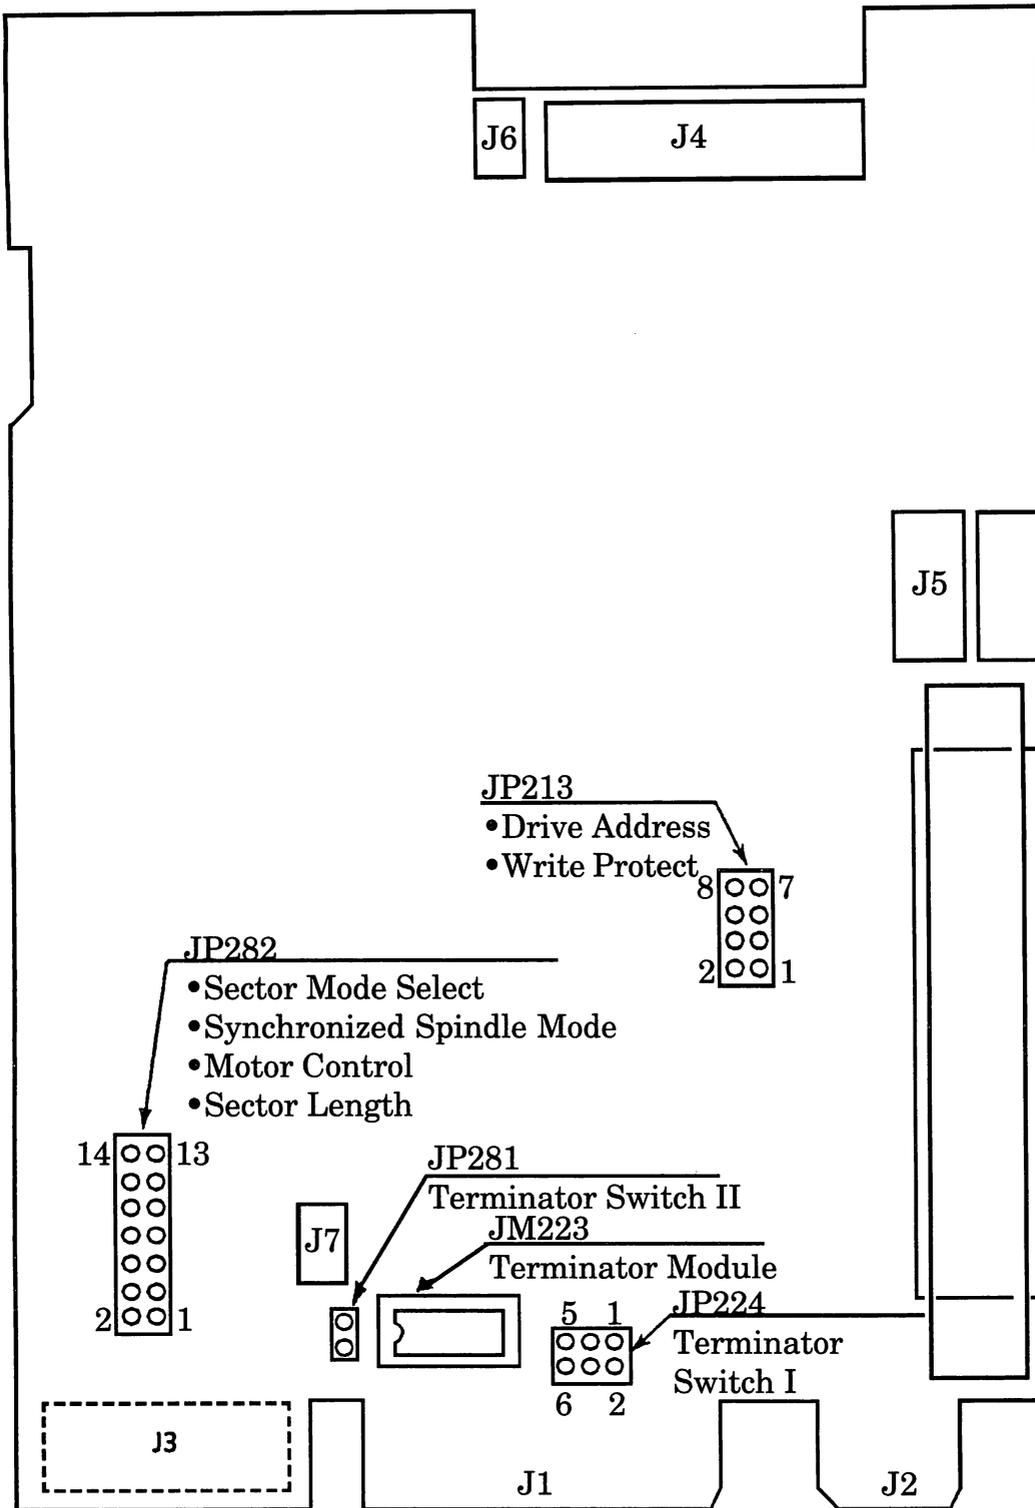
SZ931 PCB Layout (Rev. 1 or later)
